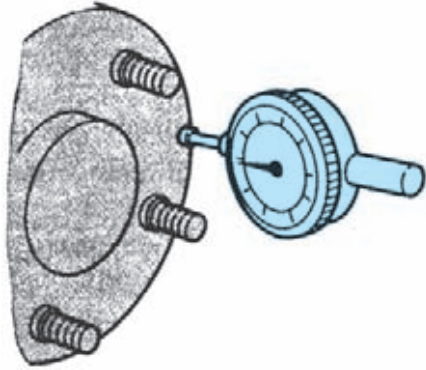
This dial indicator is set up to measure axle flange lateral runout, which can cause the wheel to wobble. (Courtesy of Ford Motor Company)
